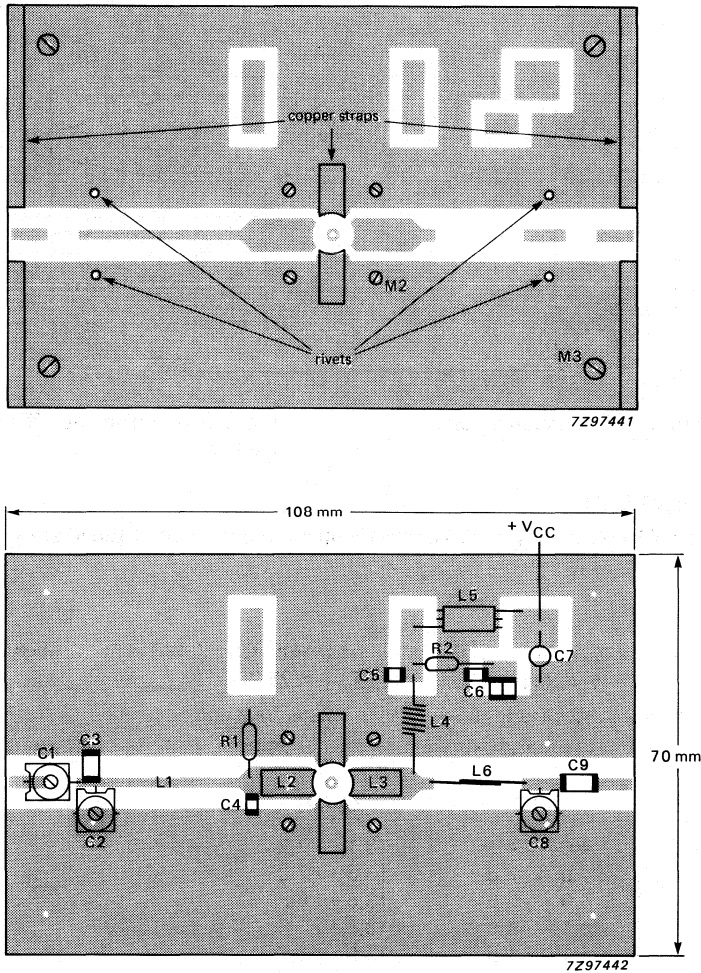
Printed wiring board and component lay-out for 470 MHz class-B test circuit.
